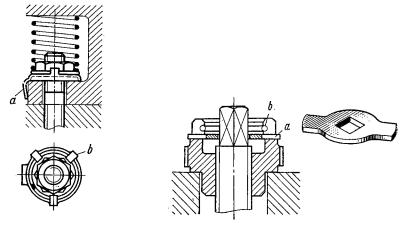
Nut locked by safety washer pre-assembled with helical spring
